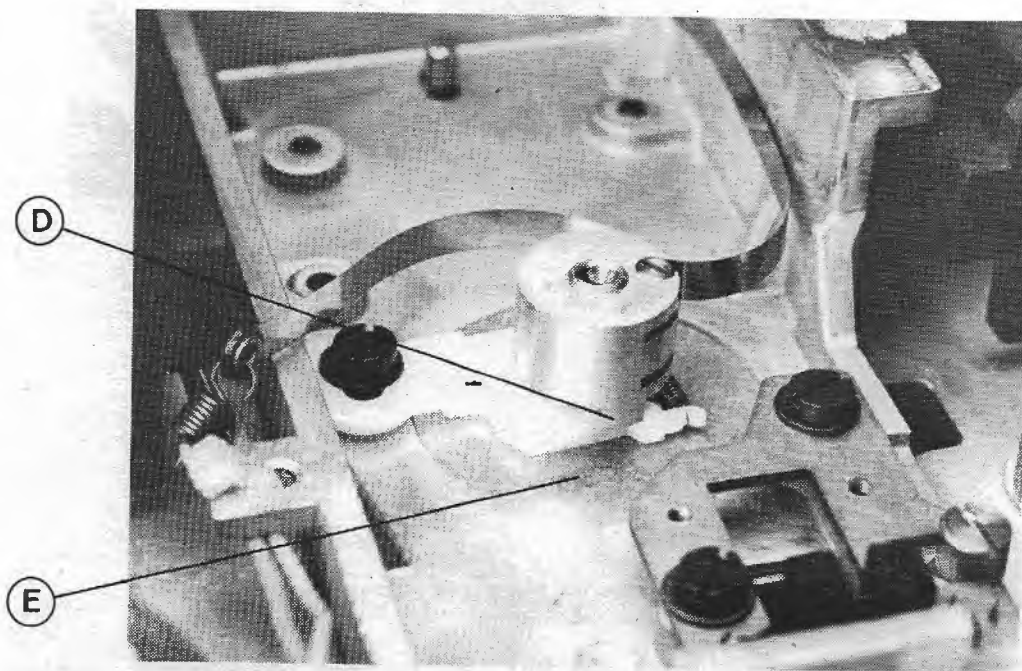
FD 801/FD 802 - Hub Assembly Regulation
